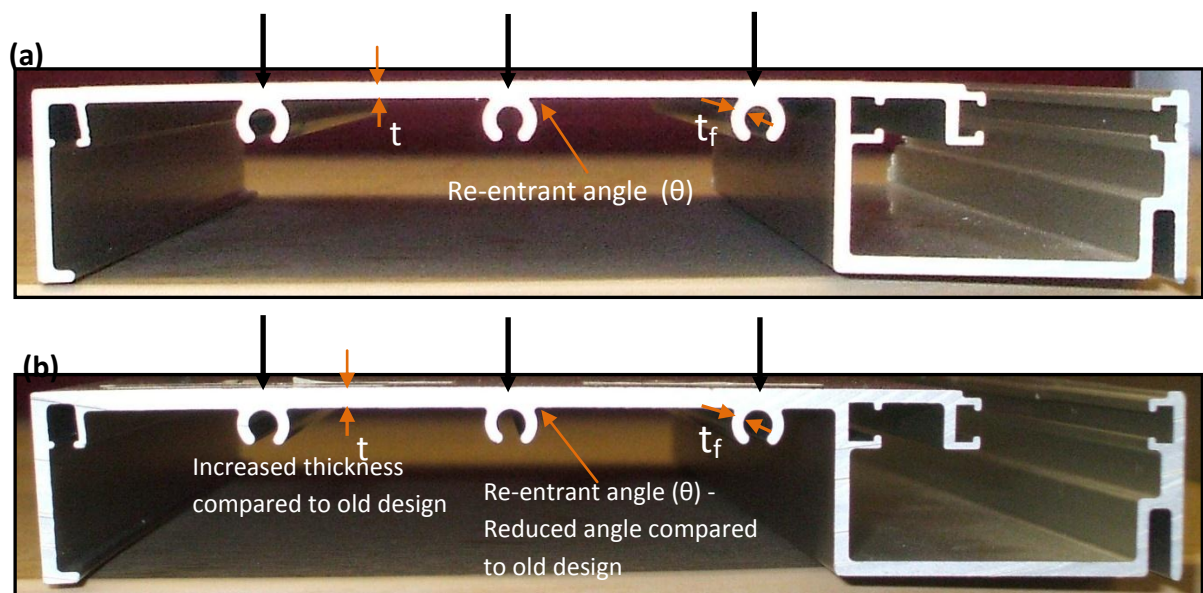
(a) Cross sectional view of extrusion version 1 - Old Design (b) Cross Sectional view of extrusion version 2 modified design
